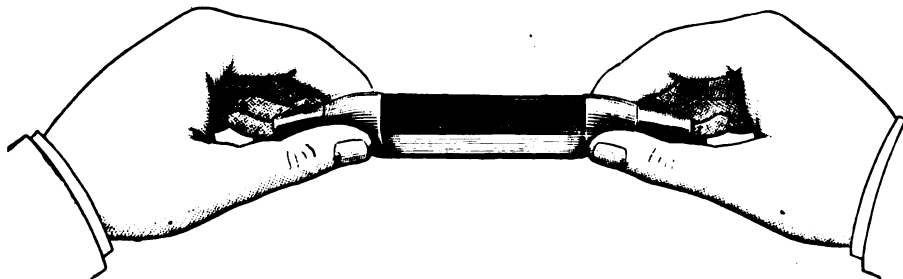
Short Tool for Use where the Handles would be in the Way.
